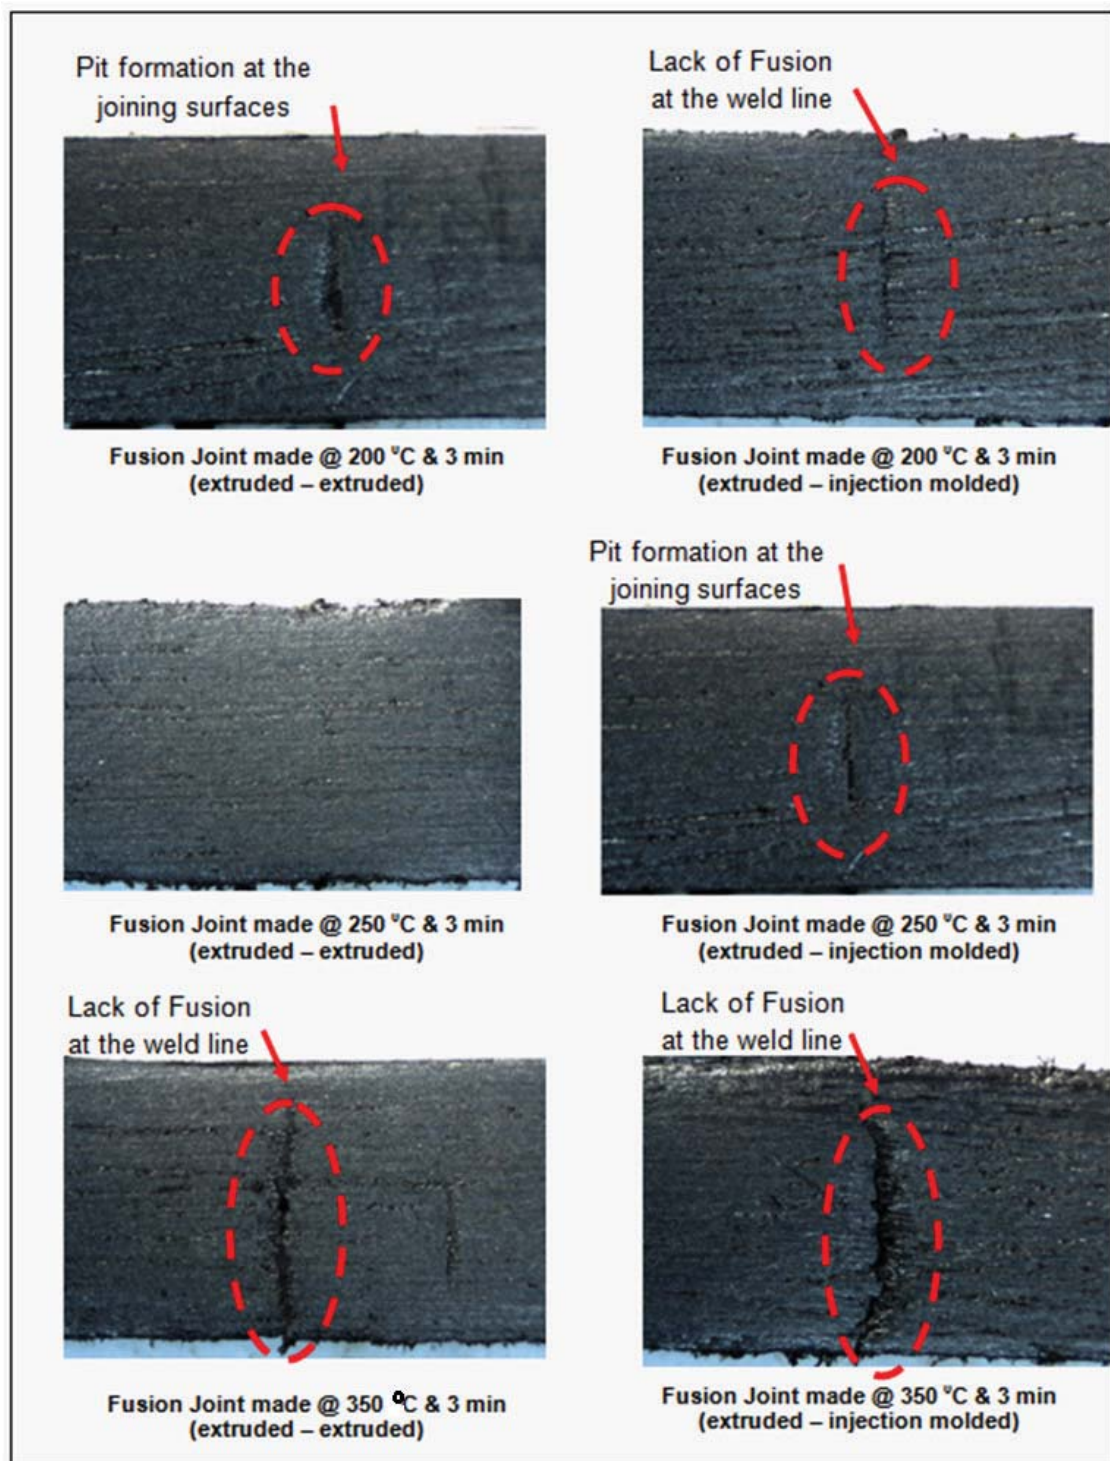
Microscopic view of fusion welded surfaces (extruded - extruded & extruded - injection molded joints)
